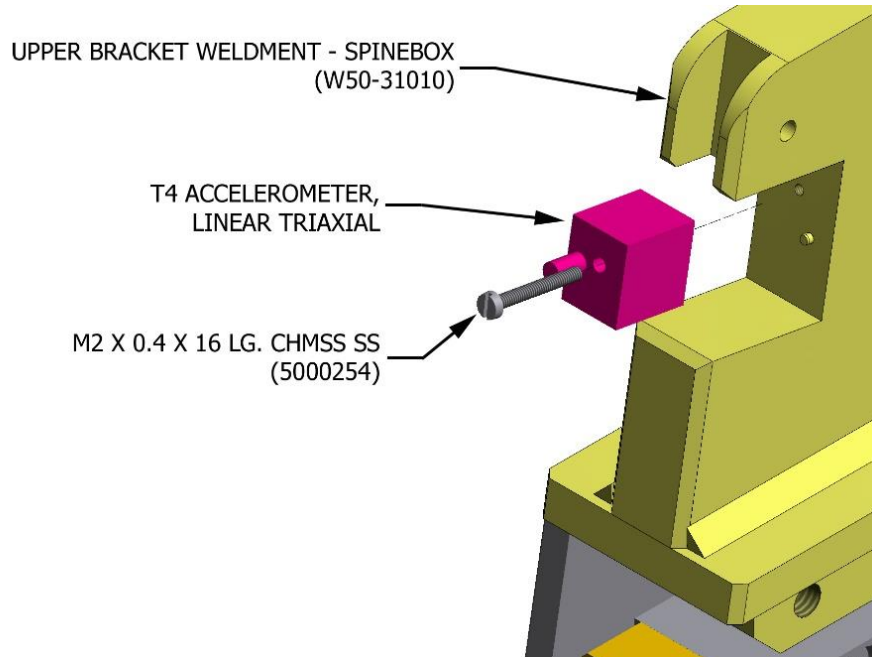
Attaching the linear triaxial accelerometer to top of spine box weldment.
